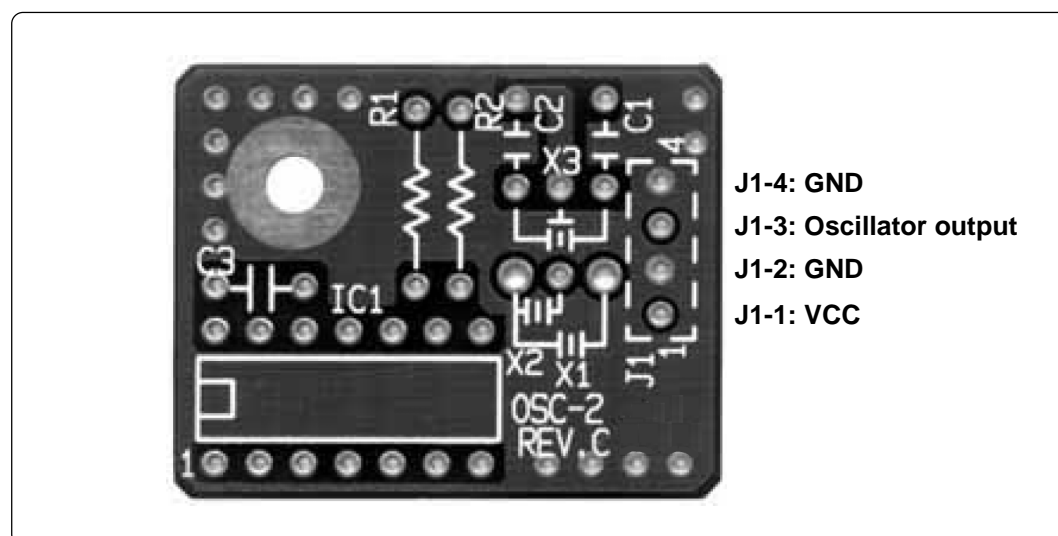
External view of oscillator board (OSC-2) and connector pin assignment
